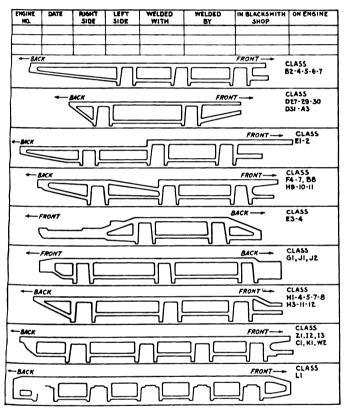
Form Used for Reporting Welding Work on Frames
